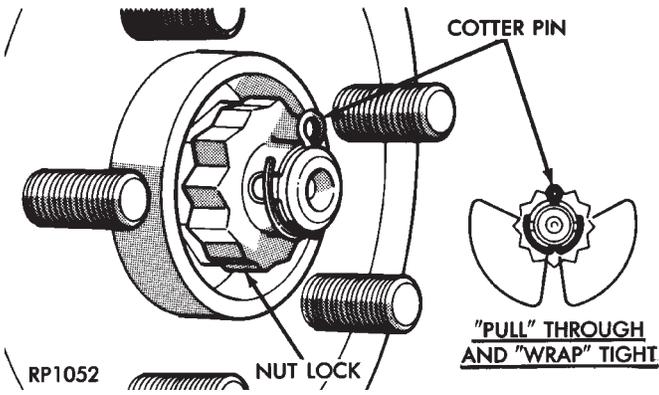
Install Spring Washer, Nut Lock, & New Cotter Pin
